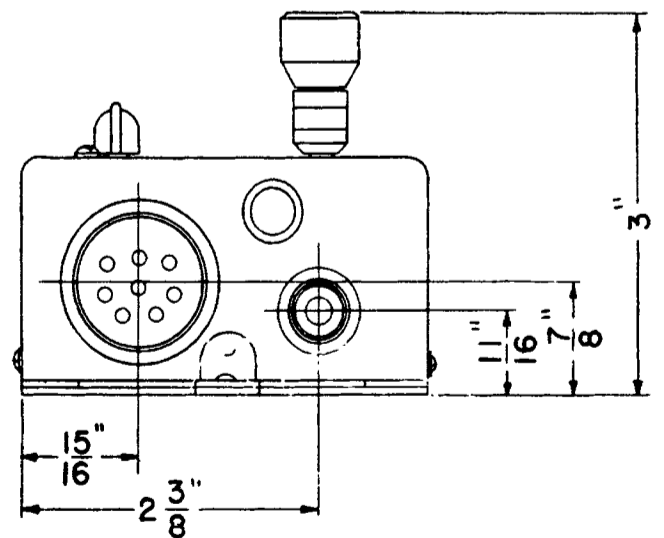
Outline Dimensional Drawing of Control Unit *C-2/ARR-2
